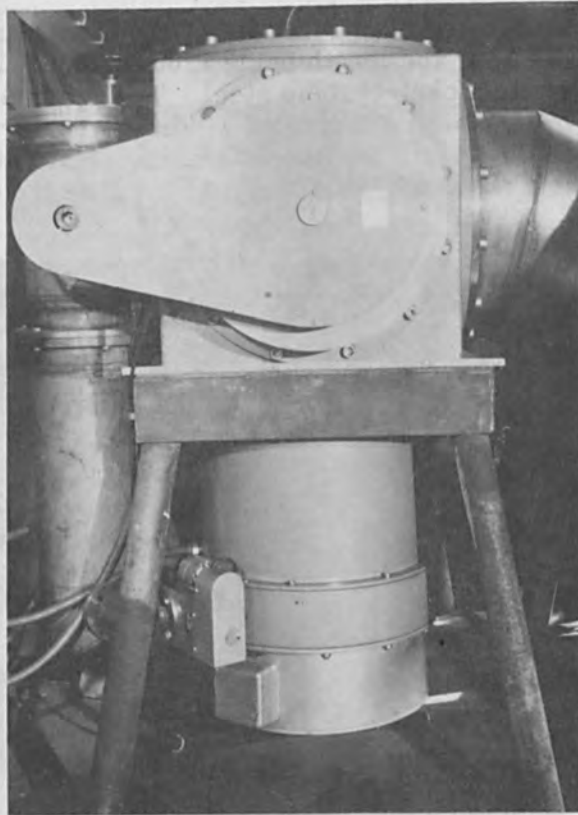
Oil-diffusion pump with corner valve of the ZIS 456 electron-beam welding unit.
